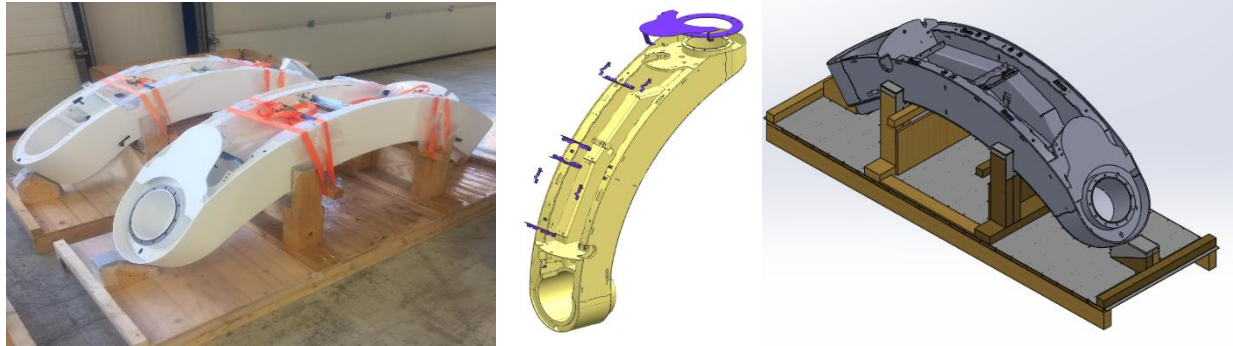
VB: Picture (Left), Exploded View (Middle), On Dedicated Pallet (Right)
